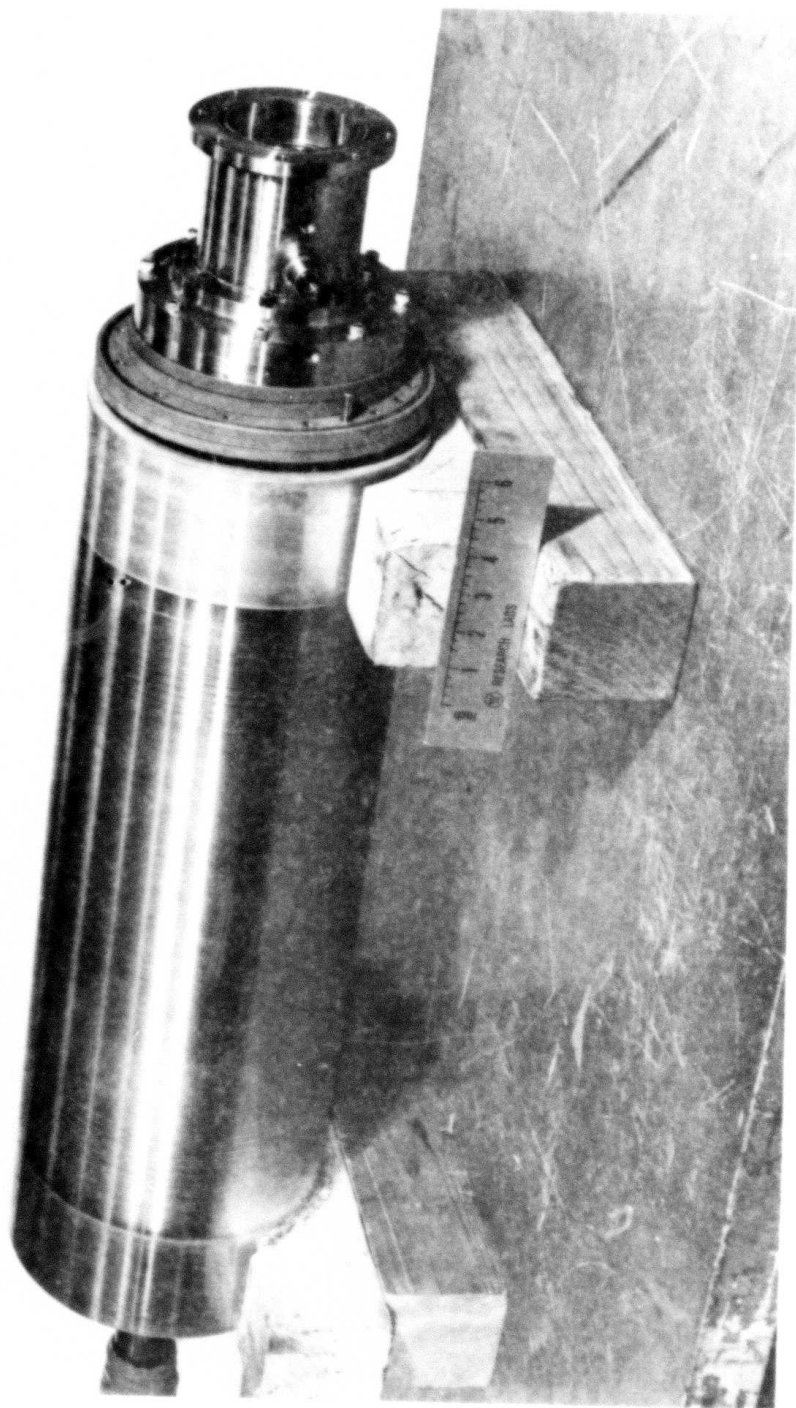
MEB rotor showing copper drum, bearing housing and coolant seal system.
